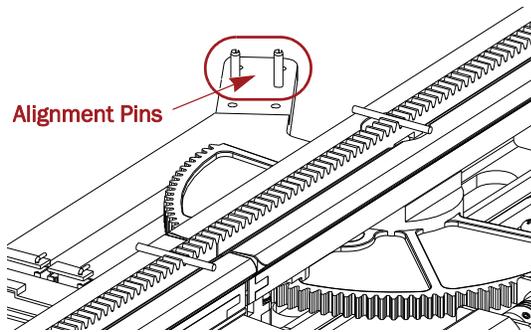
Rear Z-Axis Alignment Pins on Track Plate
